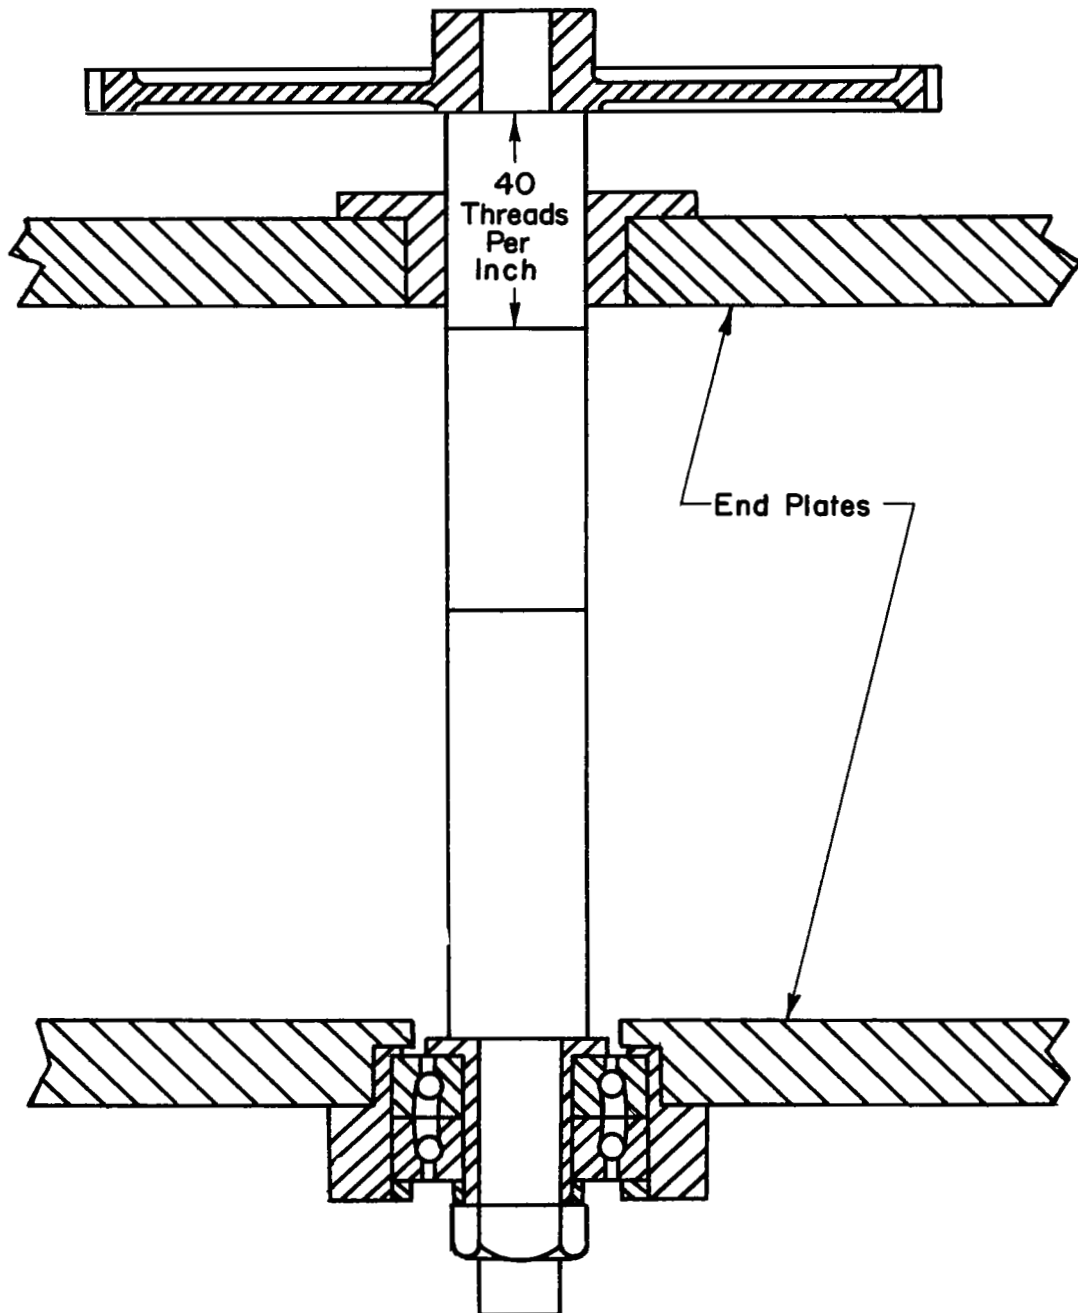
DETAILS OF TESTING MACHINE LOADING SCREW
